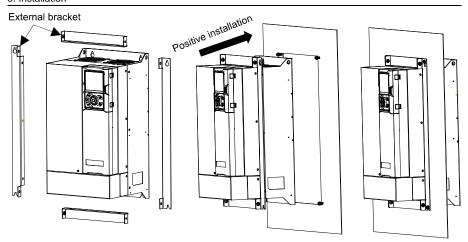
Diagram of steps for sheet metal structure embedded installation Table 3-6 Table of accessories shape and assembly size for embedded installation
